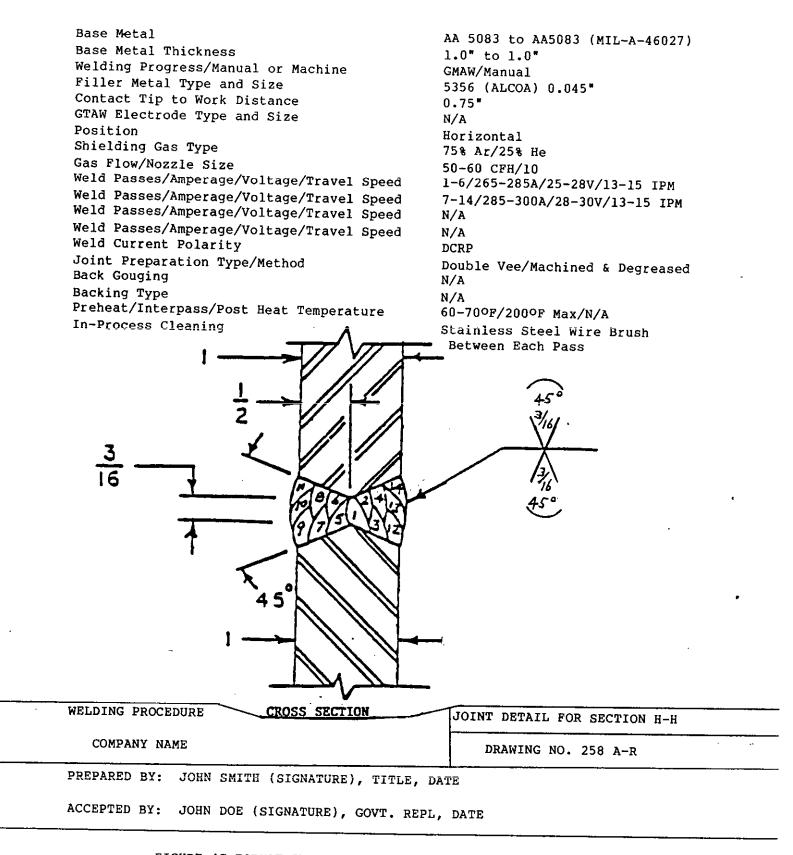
G FORMAT IV. Example of a sketch for a joint H-H in joint welding procedure.
